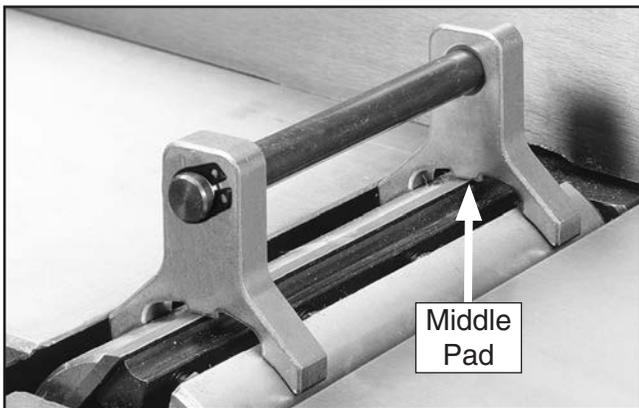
Example of knife-setting jig positioned over cutterhead knife.
